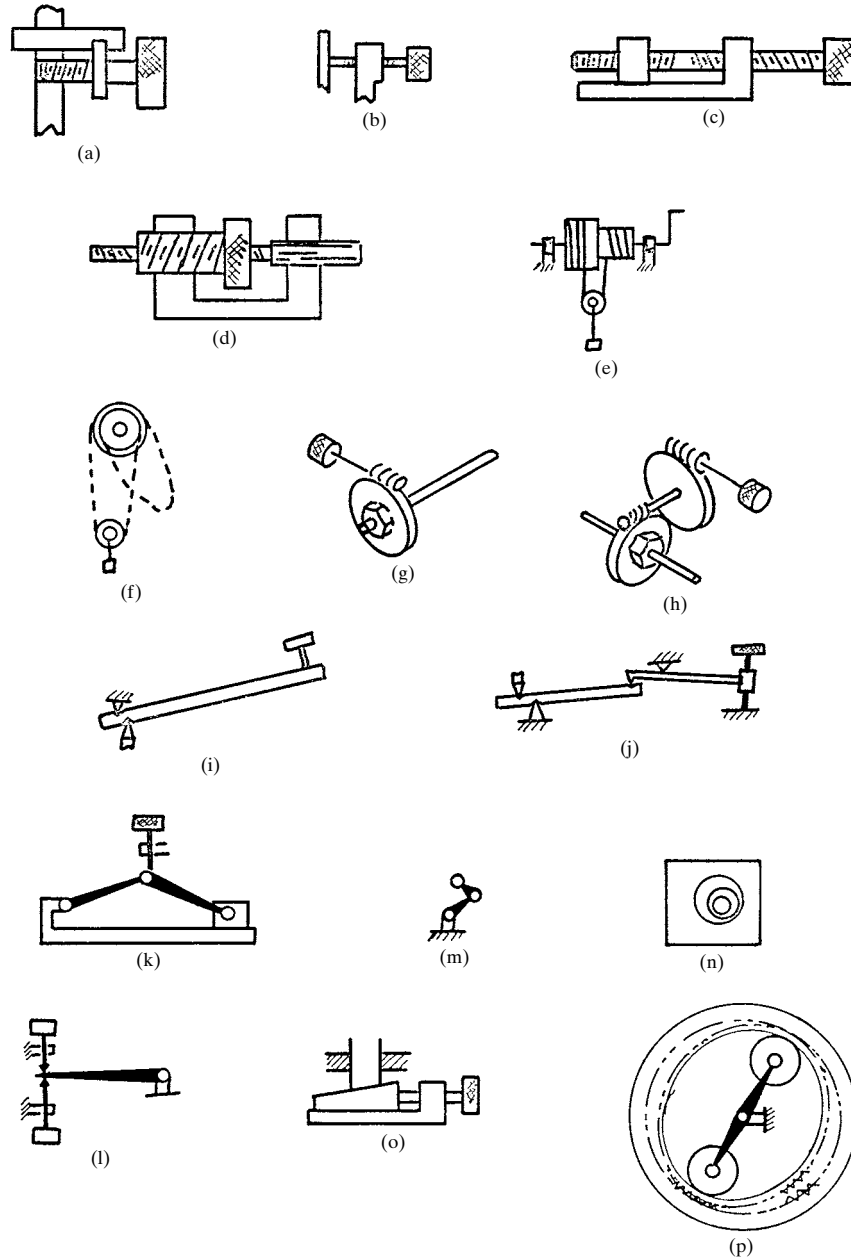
Fine adjustments I. Fine adjustments for stationary mechanisms are mechanisms that make a small change in the position of a mechanical member. (a), (b) Screw adjustments; (c), (d) differential screws; (e) Chinese windlass; (f) differential hoist; (g) worm gear and screw; (h) worm gears in series; (i) lever; (j) levers in series; (k) toggle mechanism; (l) screws to adjust angular position; (m), (n) eccentric cranks; (o) wedges; (p) harmonic drive.
